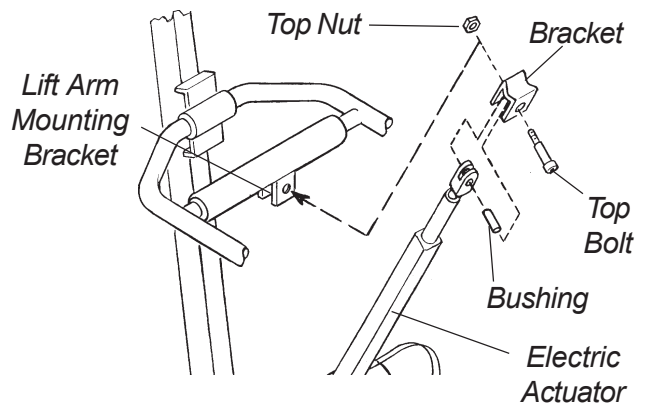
ATTACHING ELECTRIC ACTUATOR TO MAST
